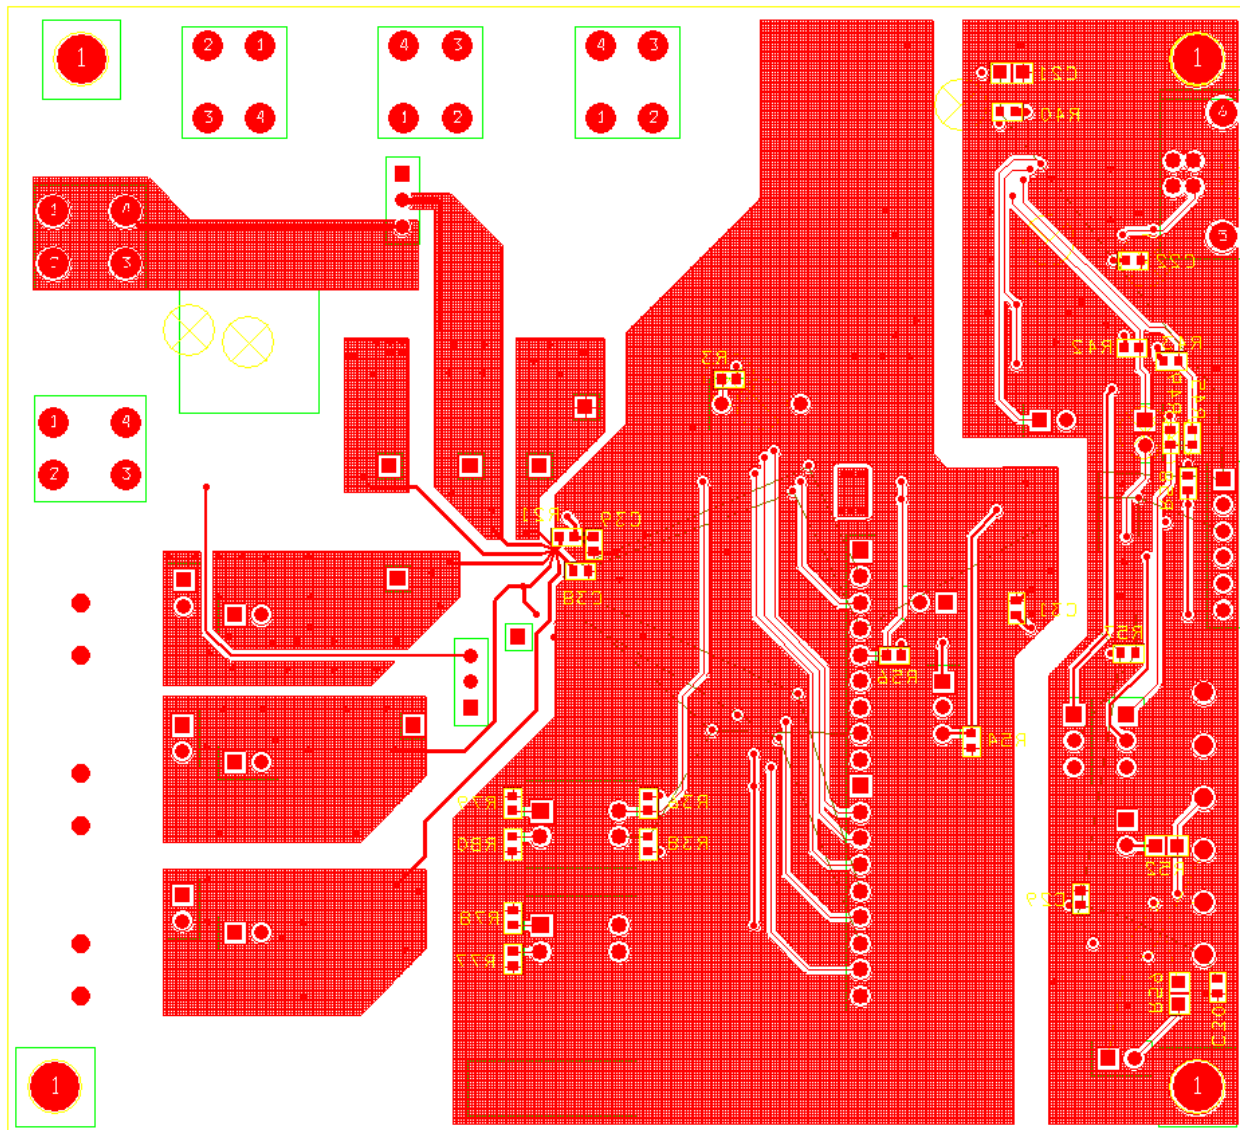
MAX78630+PPM EV Board PCB Bottom View
